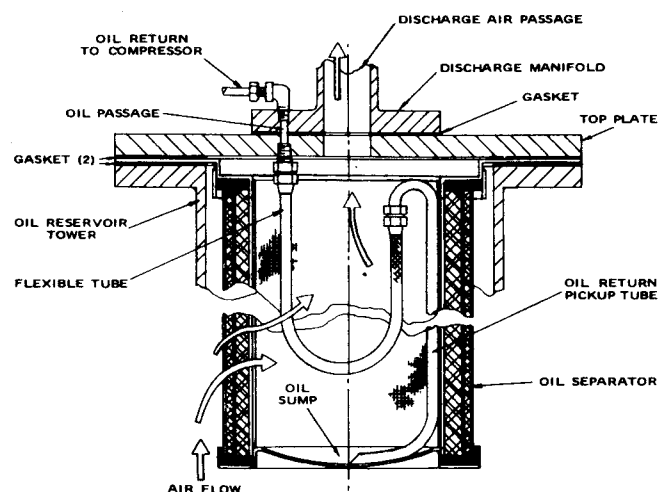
SINGLE-ELEMENT OIL SEPARATOR
